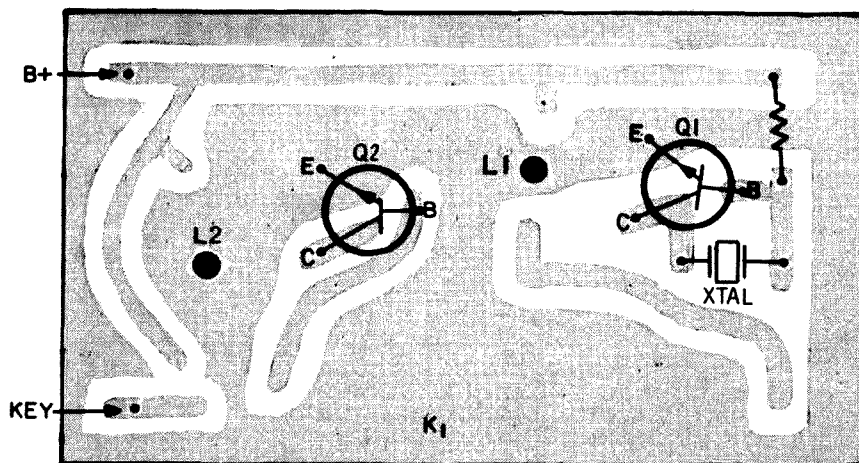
Printed circuit board. Layout is not critical, this is merely a suggestion.
